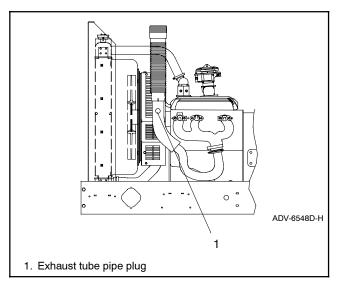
Oxygen Sensor Mounting Location, Typical (30 kW model shown)
